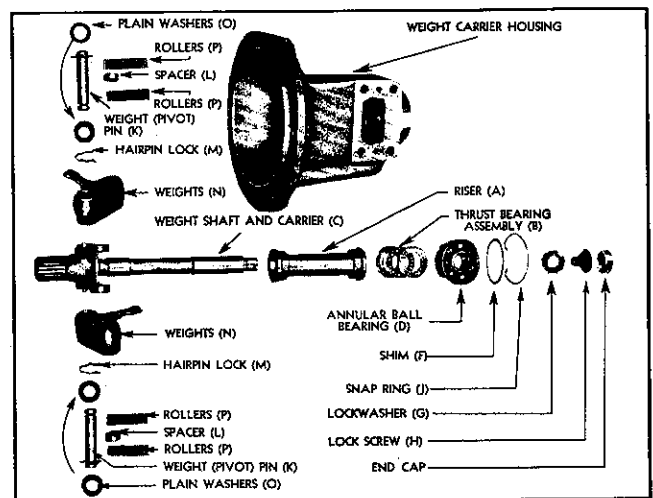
Constant Speed Mechanical Governor Weight and Housing Details.
